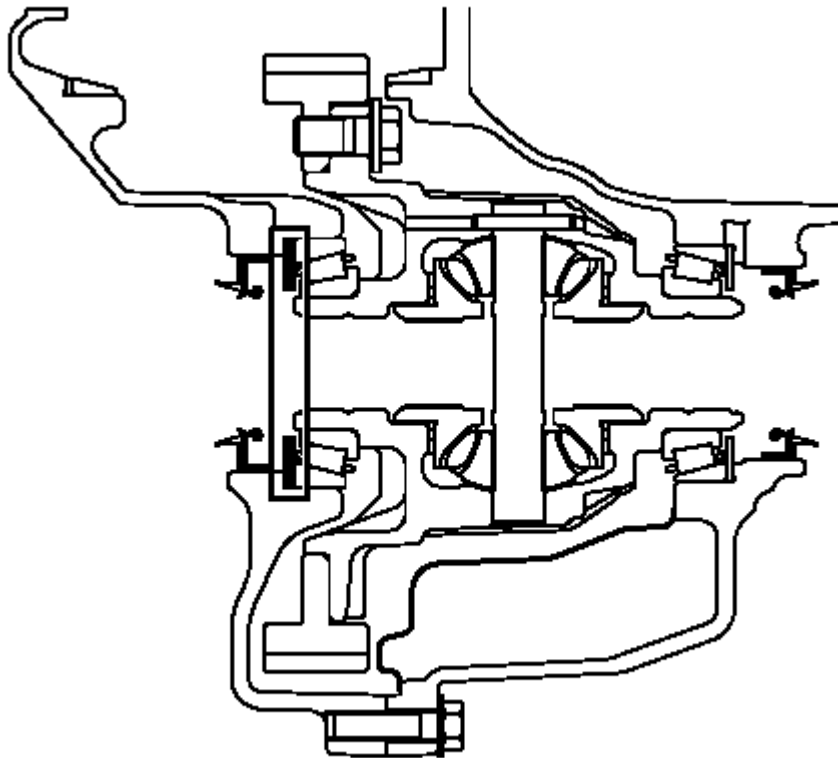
Differential Gear Bearing Race Adjuster Shim
